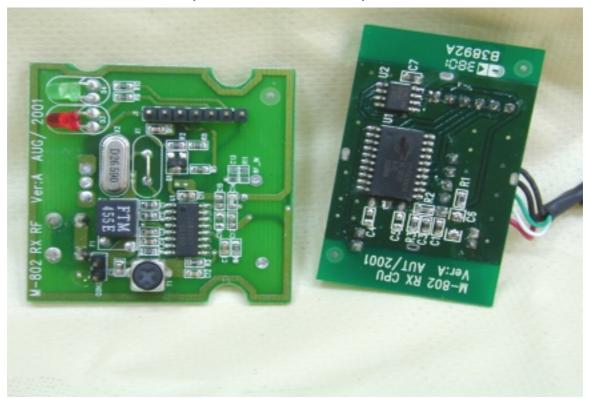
EUT (Model RM-802 Receiver) COMPONENT SIDE VIEW
